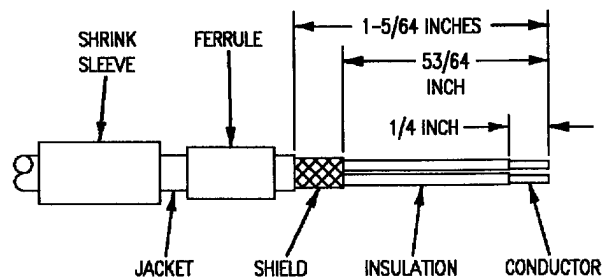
5811-XXXX and 5813-XXXX Twinax Connector Repair (Sheet 3)
